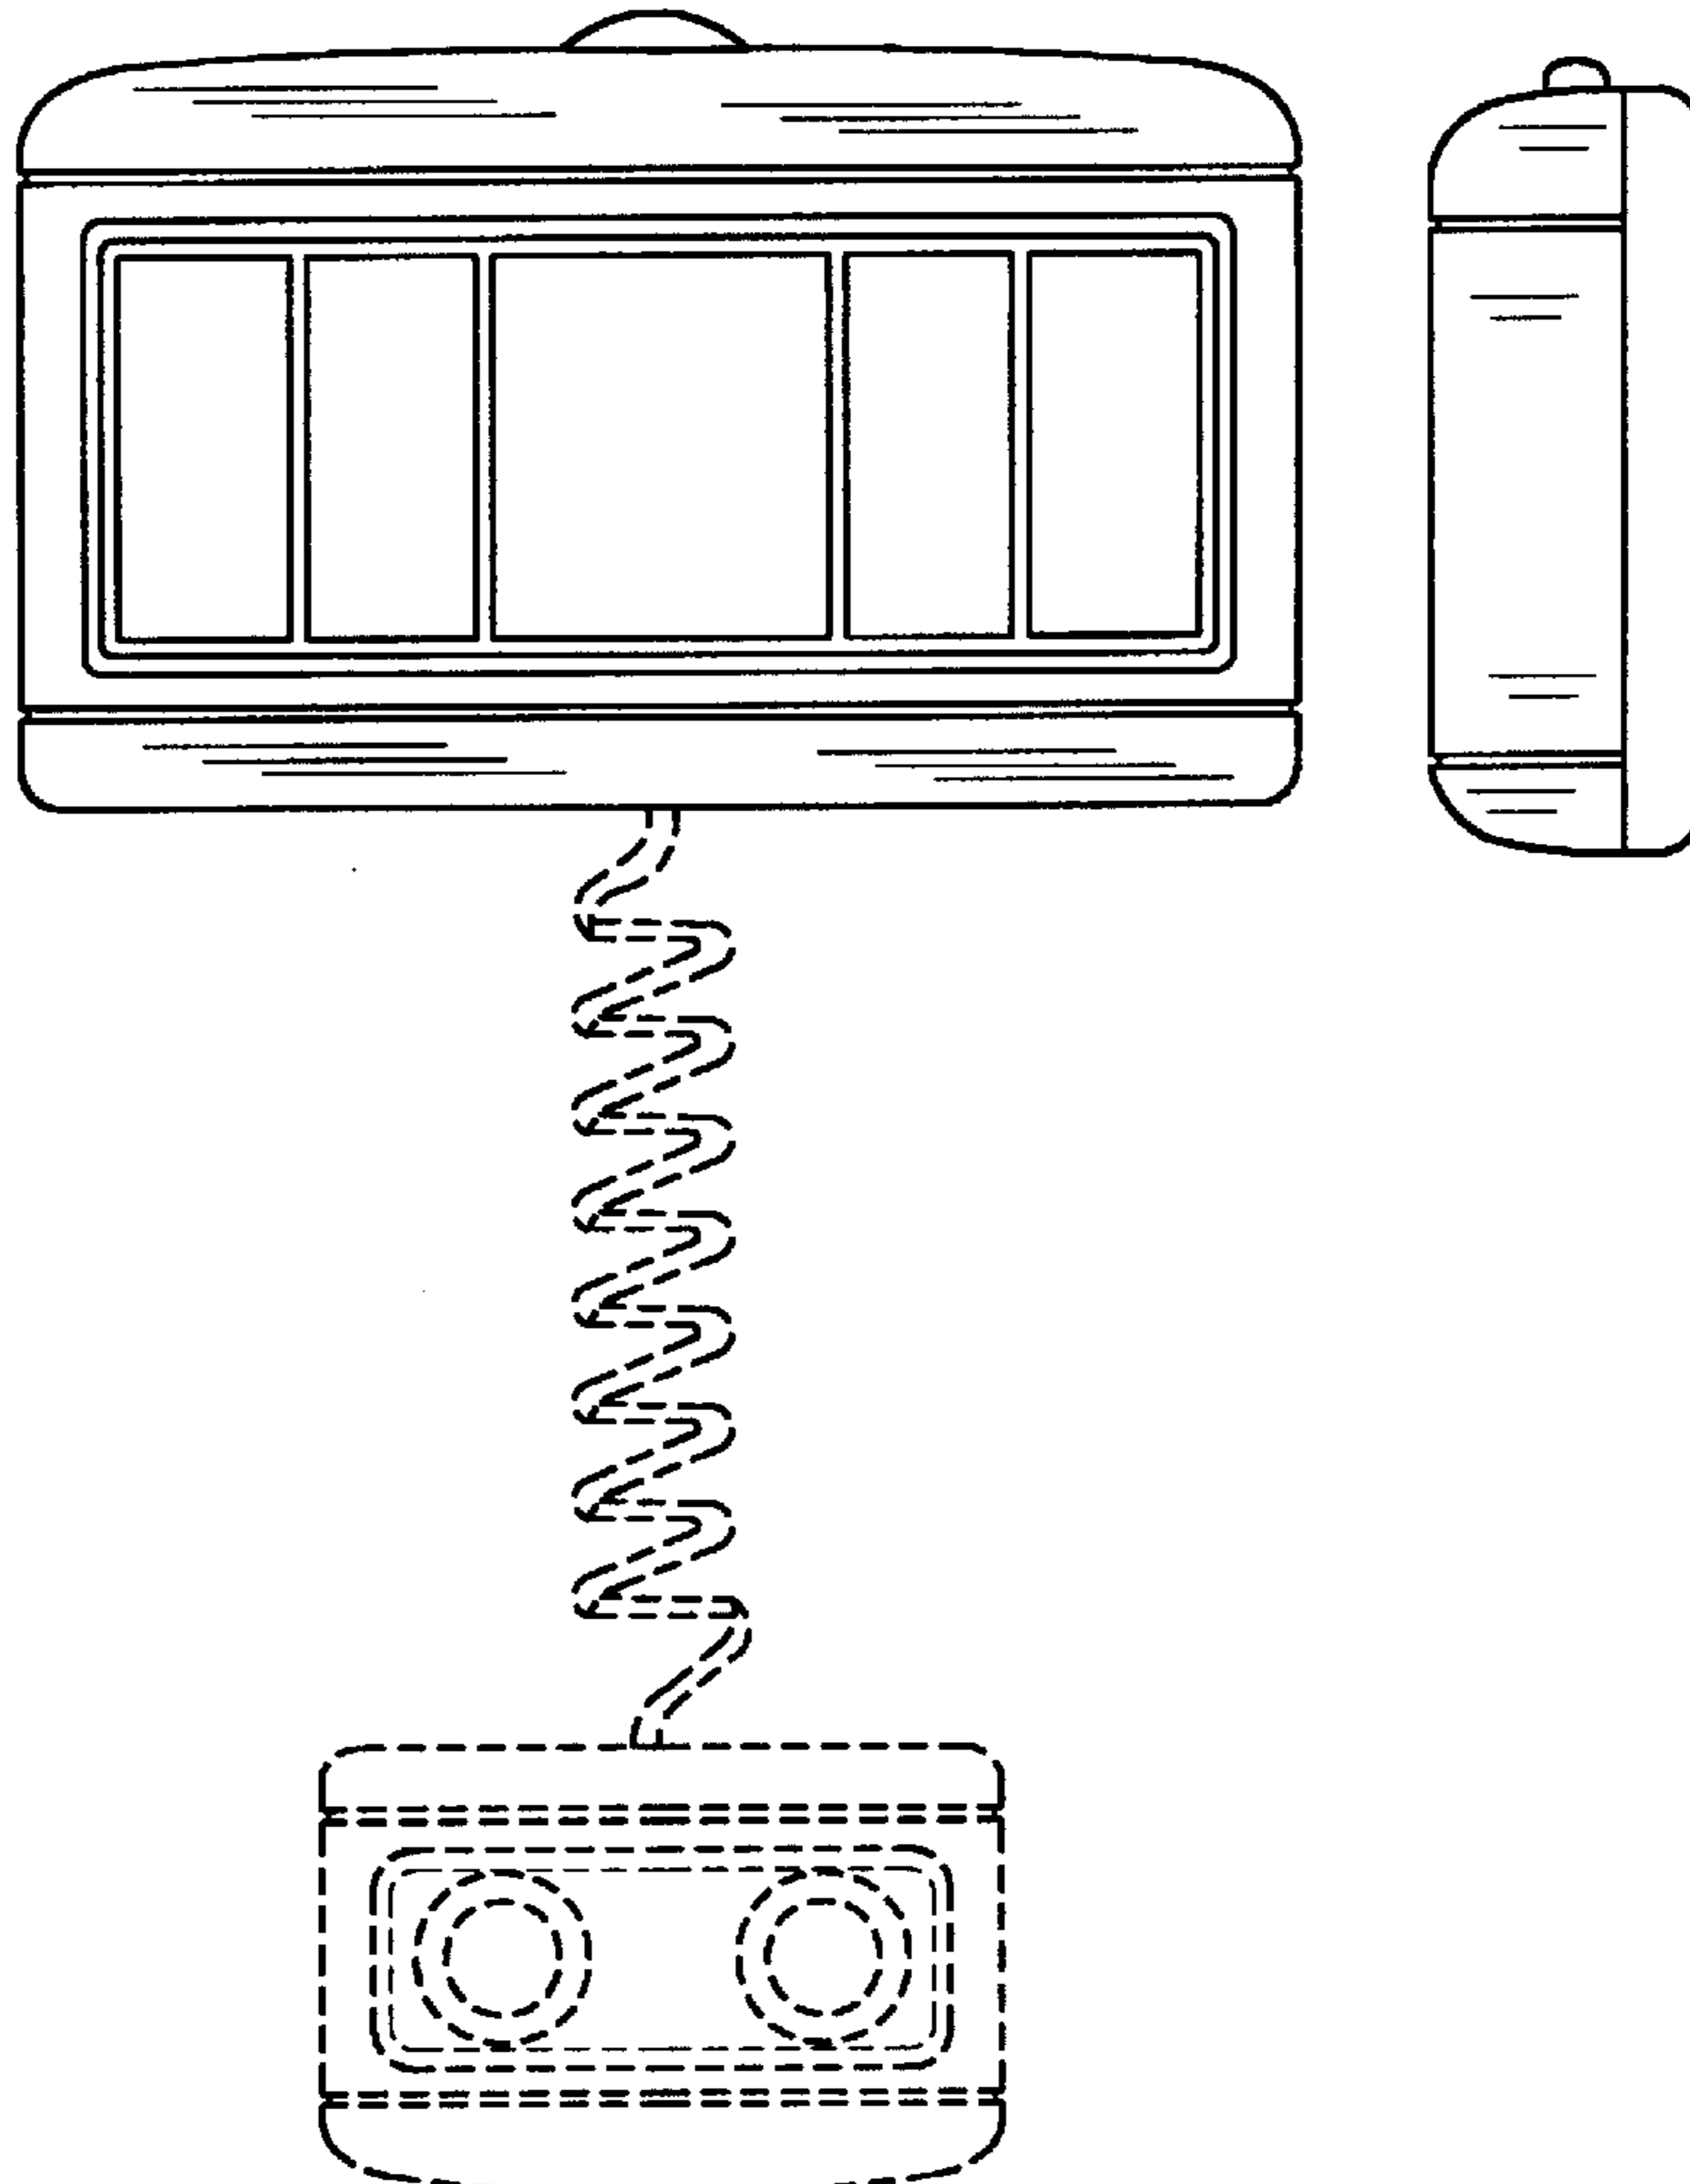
is a top view of the vehicle parking indicator sensor of FIG. 1.
